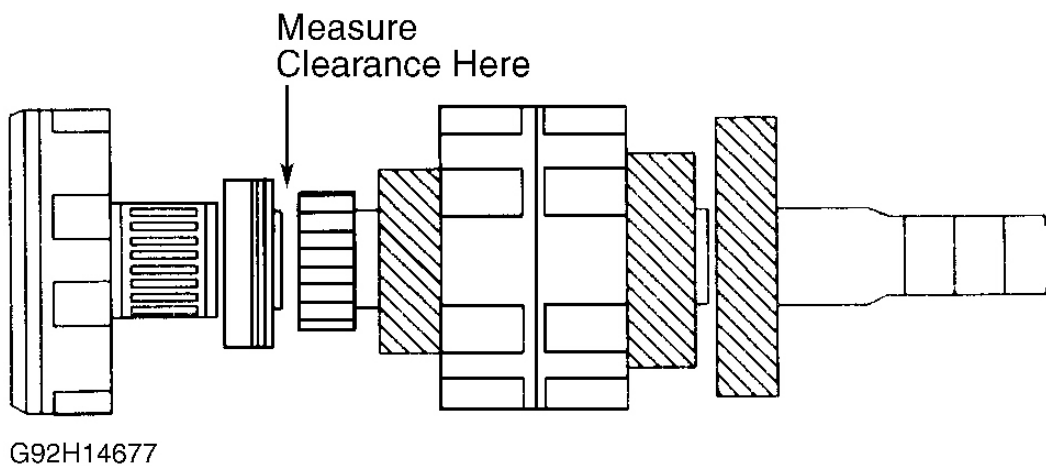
Checking 2nd/Reverse Gear-To-Thrust Washer Clearance
